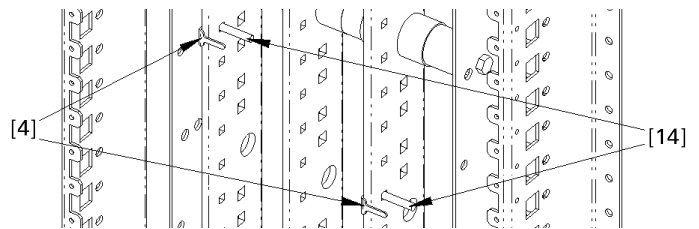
Installing carriage bolt assemblies on phases A and C, isometric view.
